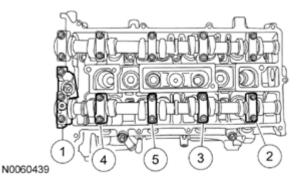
Identifying Camshaft Bearing Cap Bolts Loosening Sequence Courtesy of FORD MOTOR CO.
